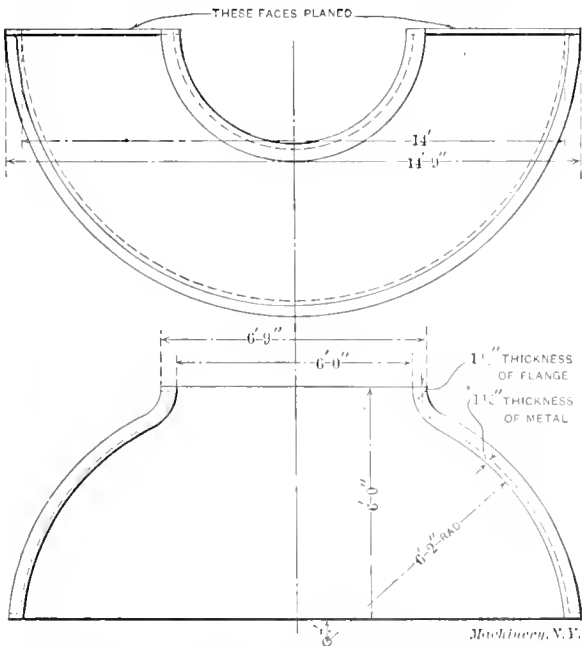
Detail of the Casting which was planed as shown in Fig. 1.
